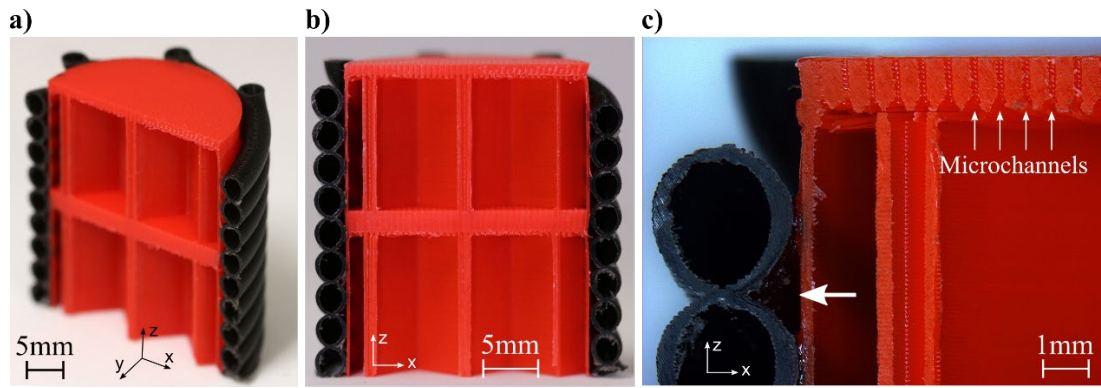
Pictures of the internal structure of the hybrid material with 4-layers microchannels and 7 tubes: a) Perspective view of the assembly b) Front view c) Detail of the upper left of the sample.
